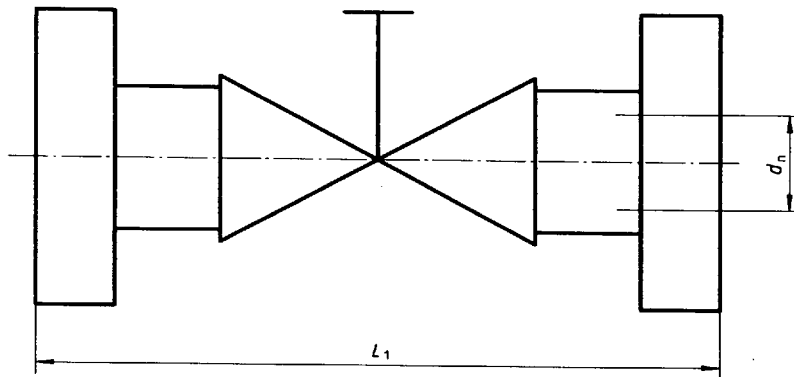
Plug, ball or diaphragm valve with flanged ends
